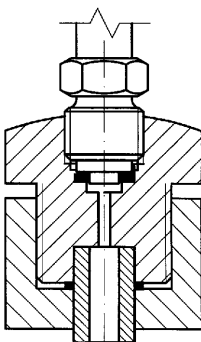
Cylindrical threads, sealing with seal at sealing surface
